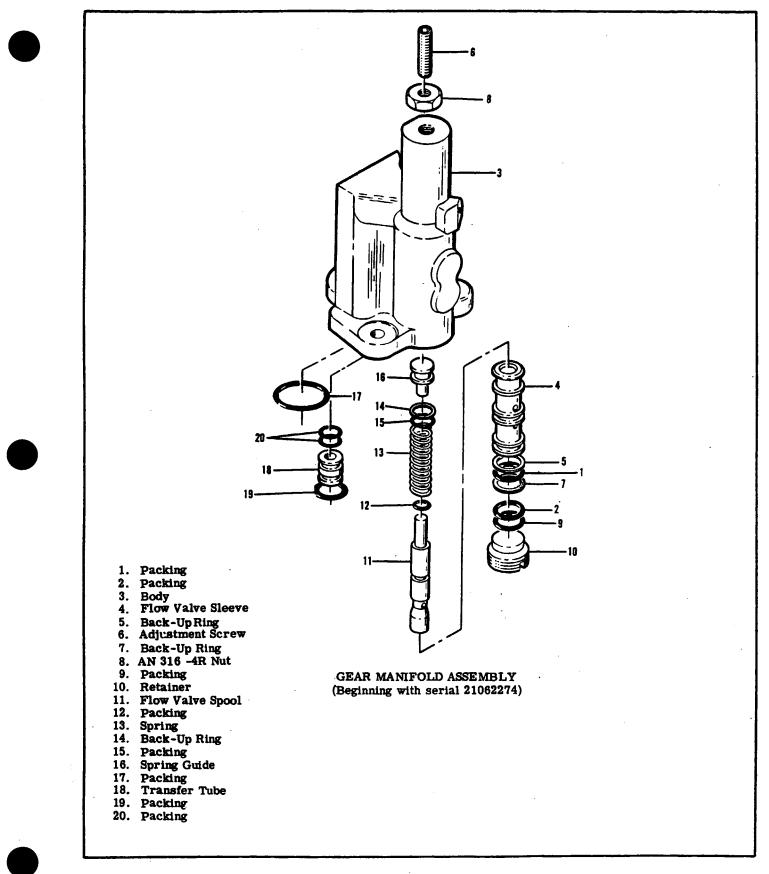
Gear Assembly Manifold and Door Manifold Assemblies
